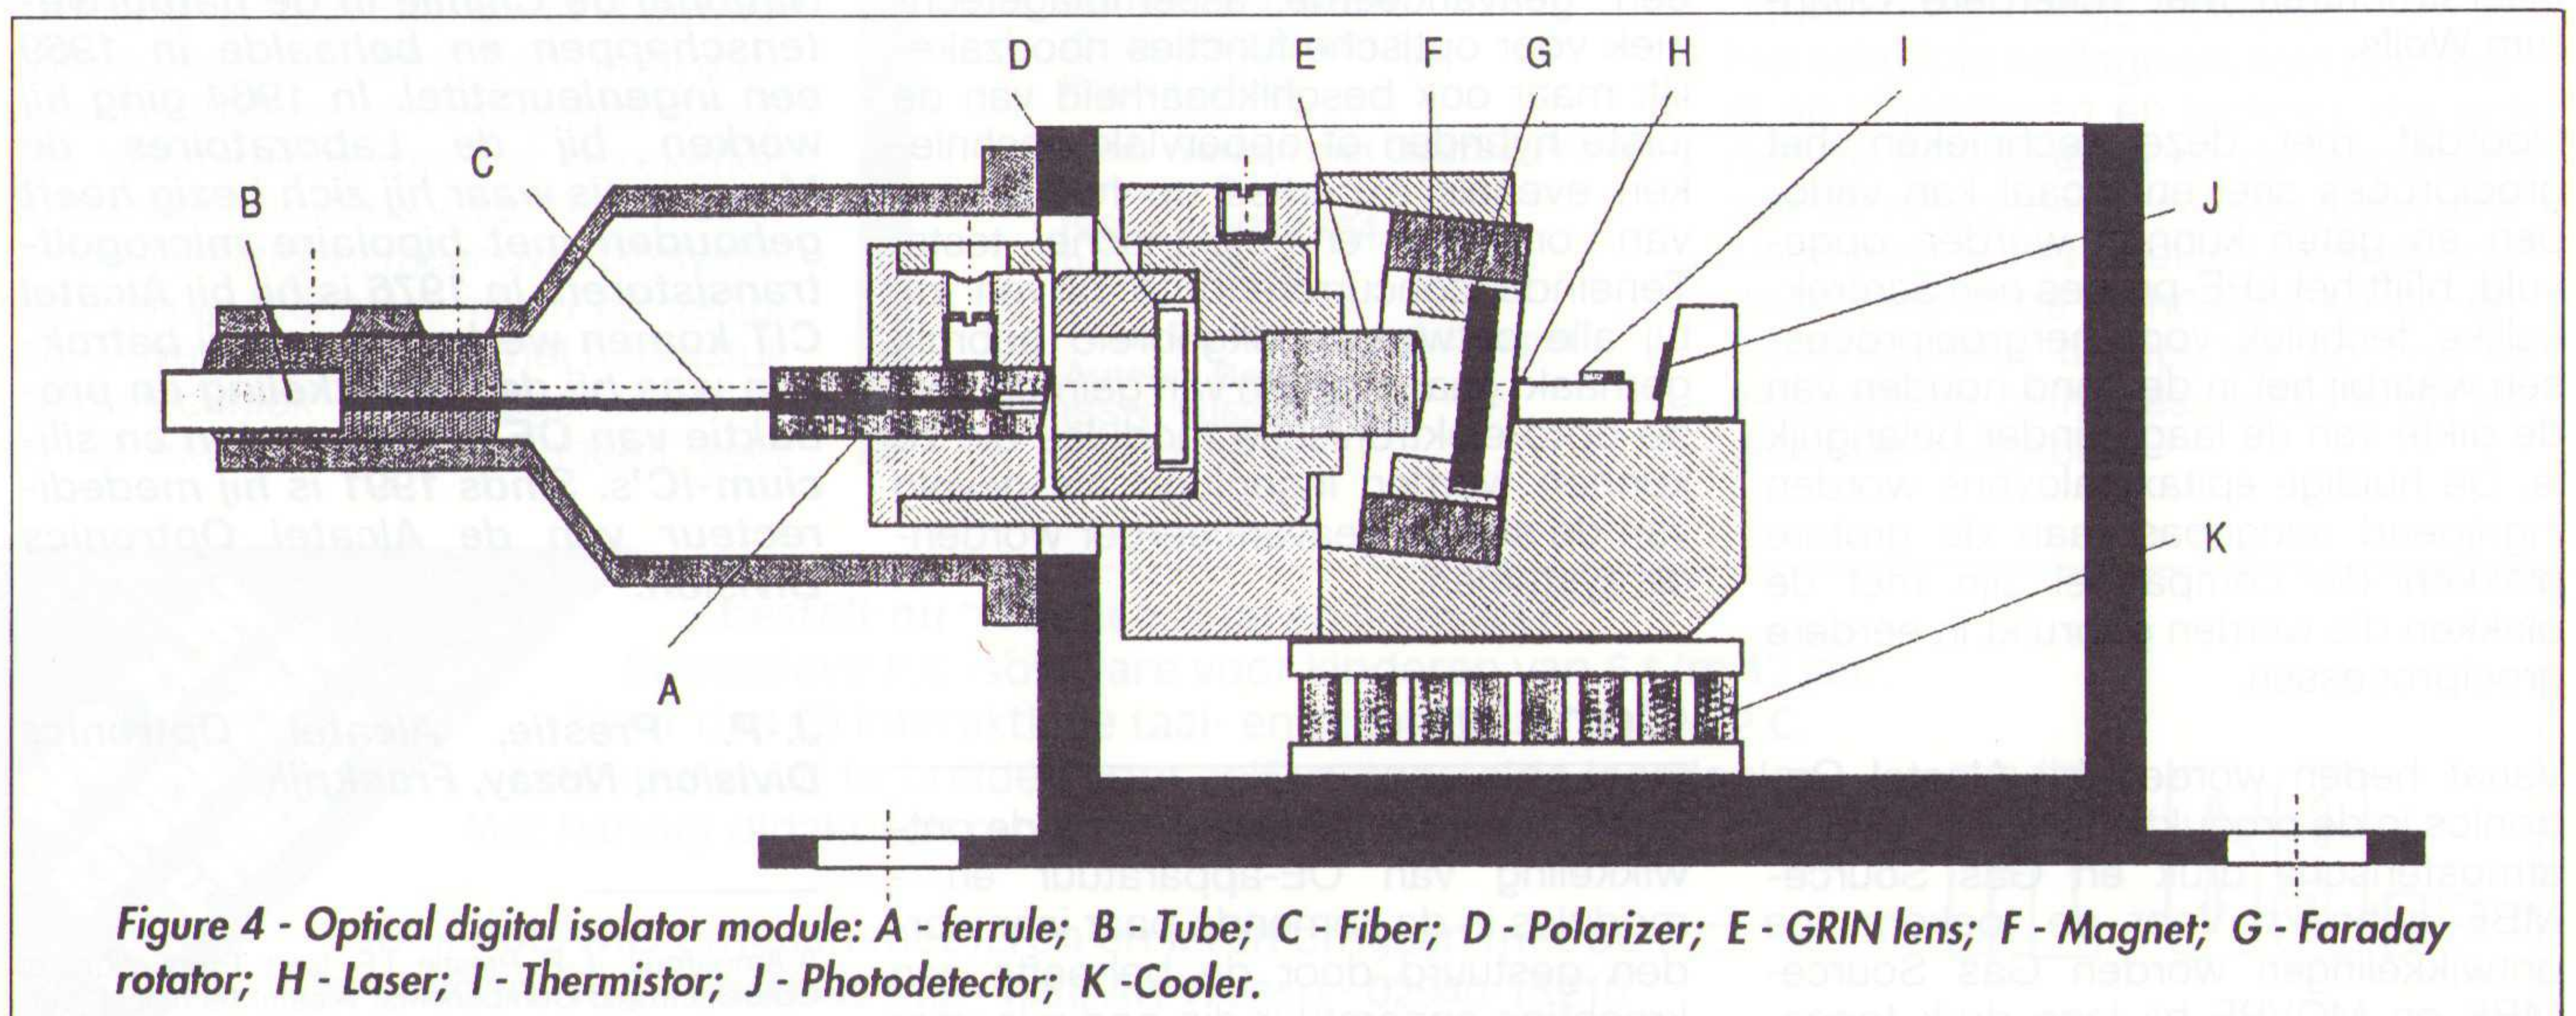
Optical digital isolator module: A - ferrule; B - Tube; C - Fiber; D - Polarizer; E - GRIN lens; F - Magnet; G - Faraday rotator; H - Laser; I - Thermistor; J - Photodetector; K - Cooler.
